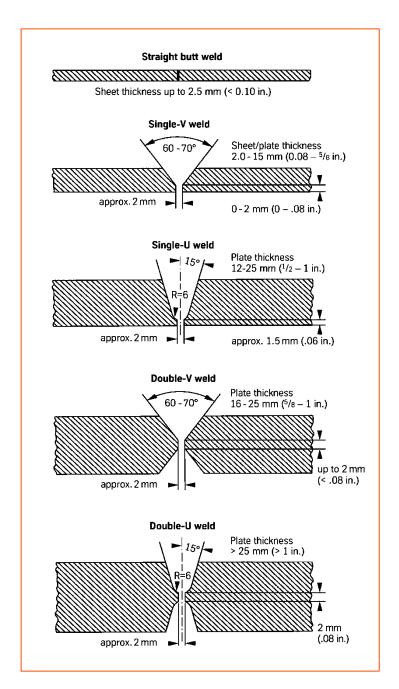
Seam preparation for welding nickel alloys and special stainless steels
